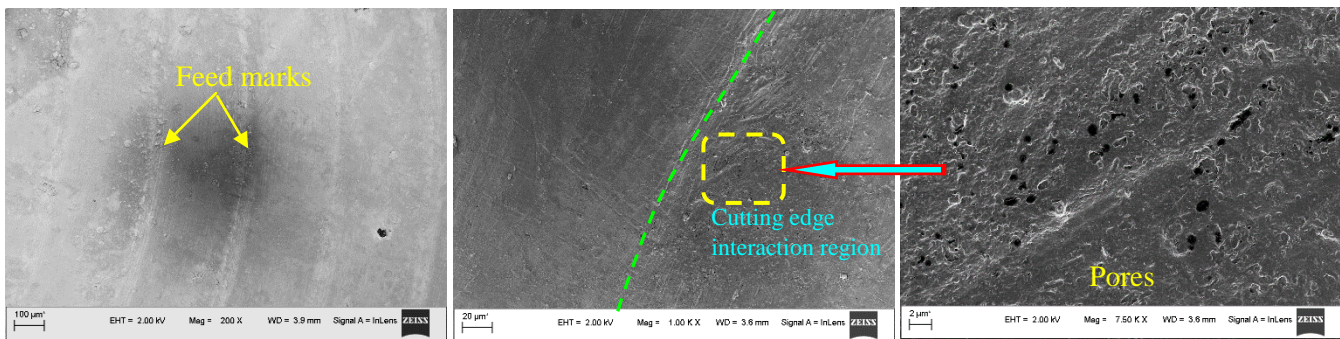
Surface morphology of end milled workpiece after MQCF machining
